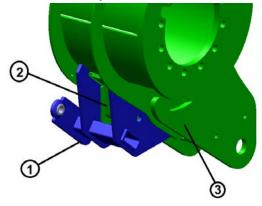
Front Belt Frame Support Key 1 – Support Key 2 – Jack Stand Key 3 – Windrower Frame
